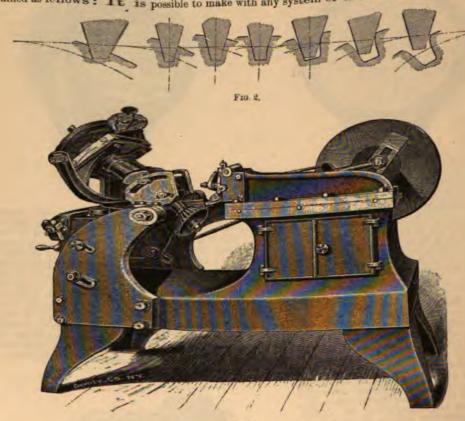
Figs. 2, 3. -Bilgram's bevel-gear cutter.
